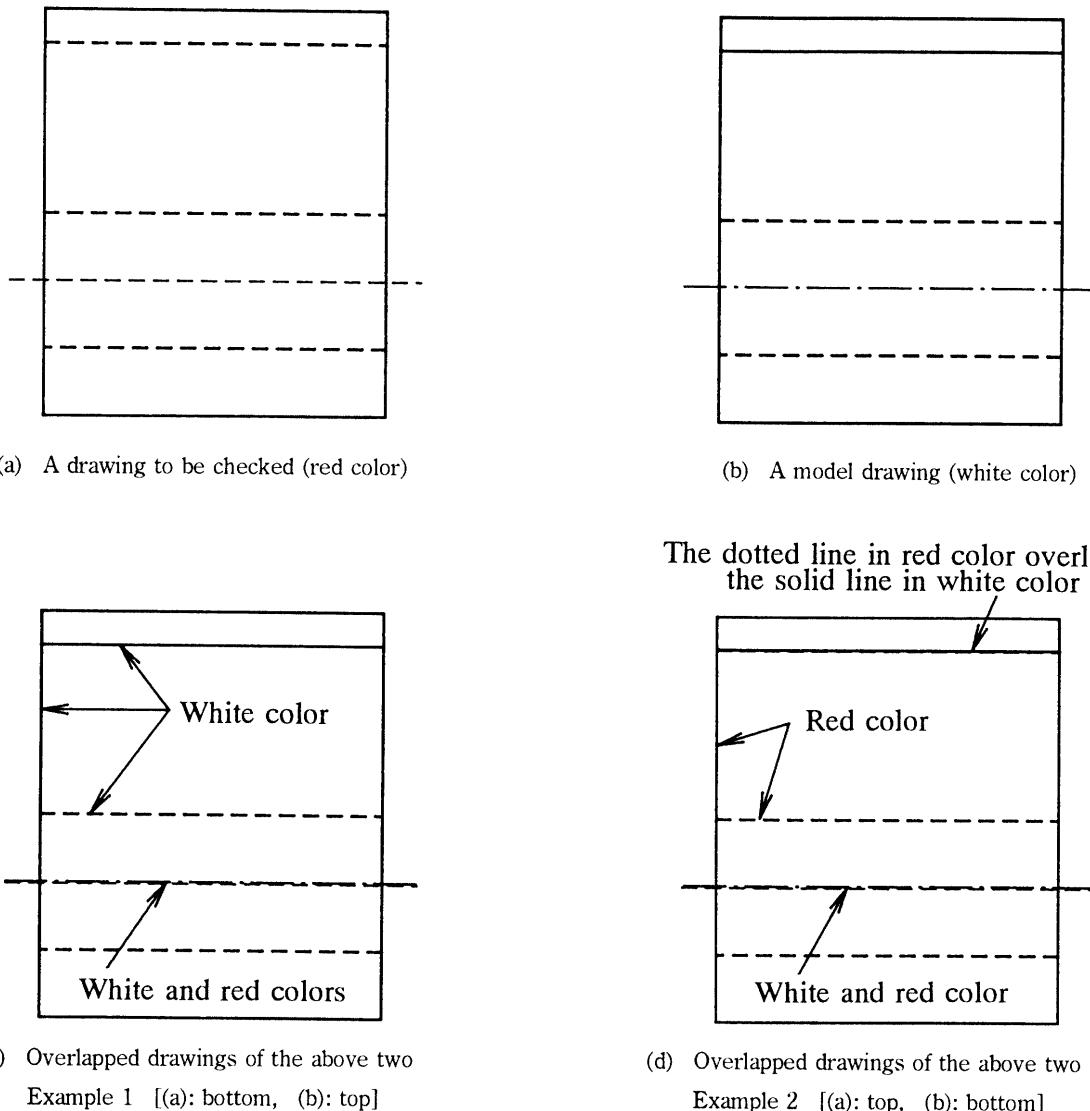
Checking kinds of lines of a machine element (An example of overlapped drawings in which the drawing (a) is not presented correctly).
